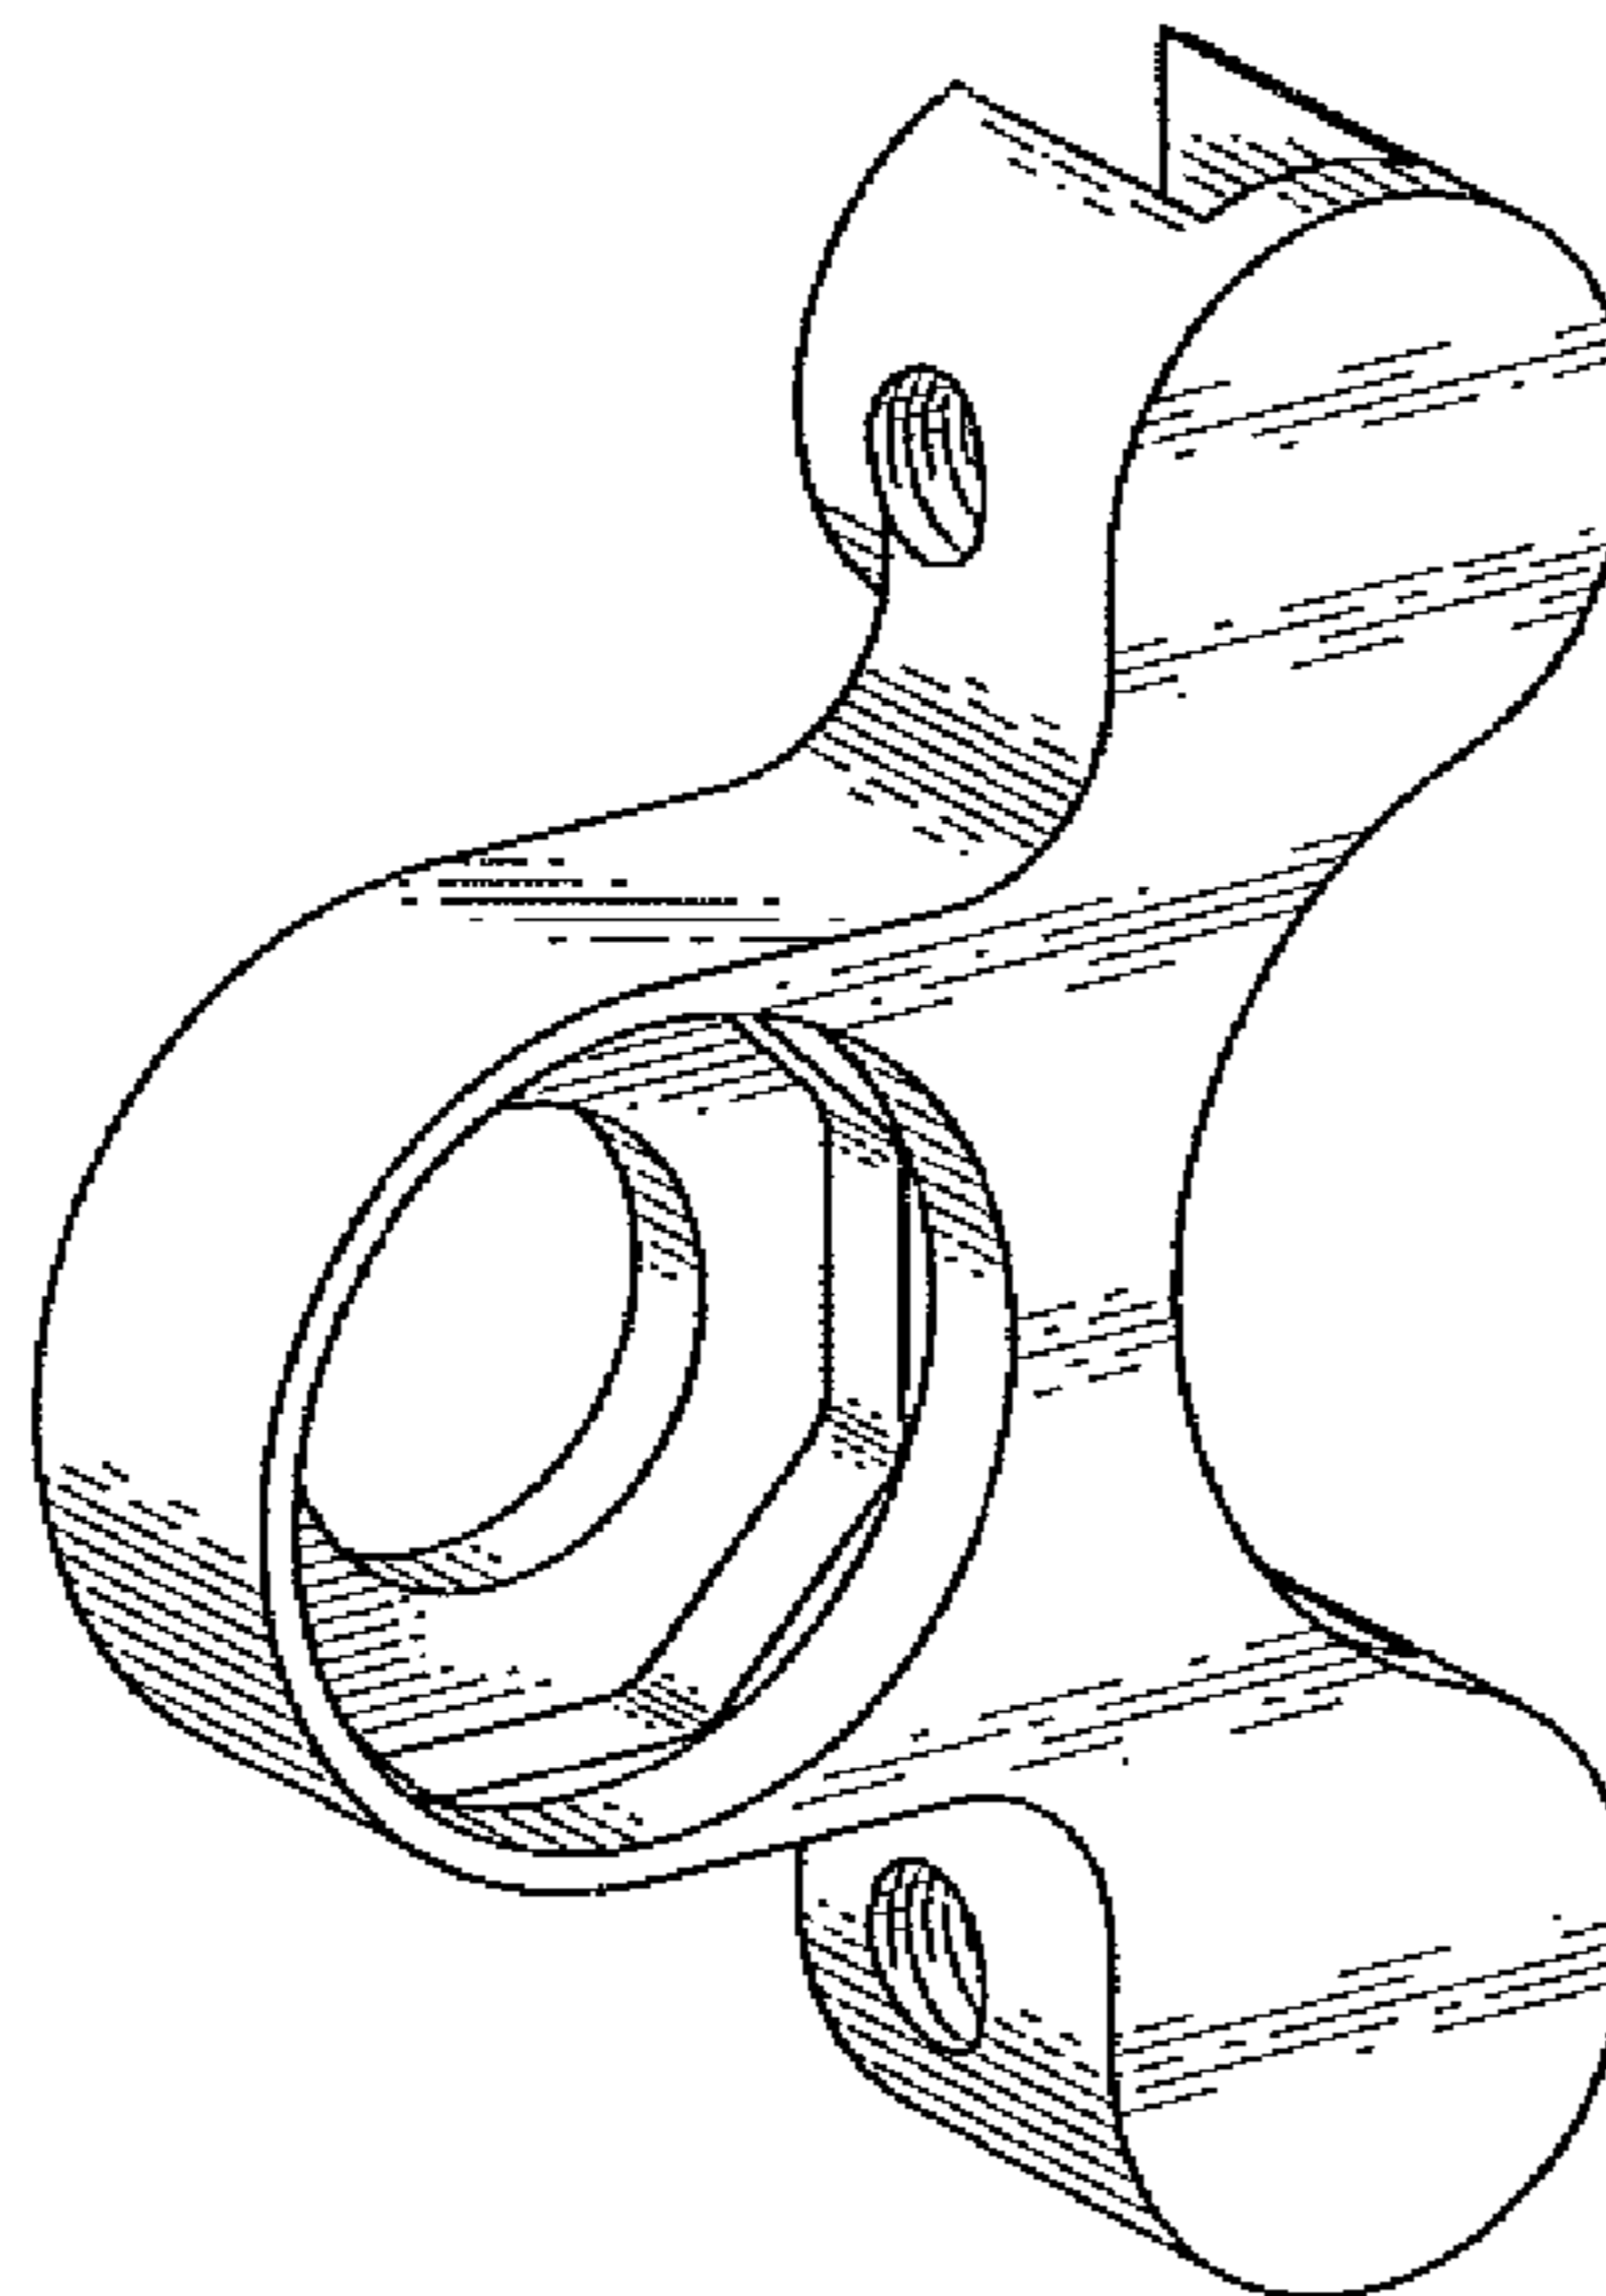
is a right side view of the adjustable bracket of FIG. 1.
